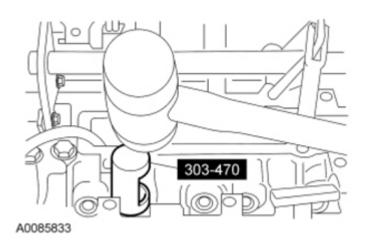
Installing Valve Seal Using The Valve Stem Oil Seal Installer Courtesy of FORD MOTOR CO.
